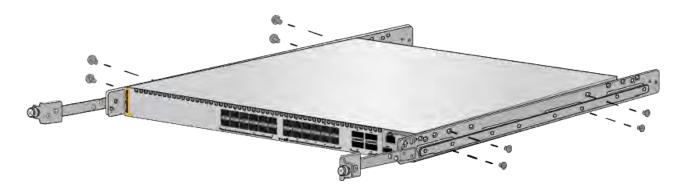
Attaching the Inner Rails to the x530DP-28GHXm Switch Go to "Installing the Switch in the Equipment Rack" on page 217.
